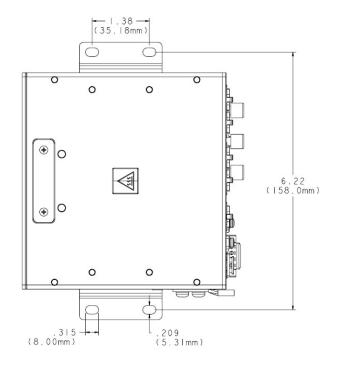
Wall/Floor mounting hole dimensions with mounting brackets attached
